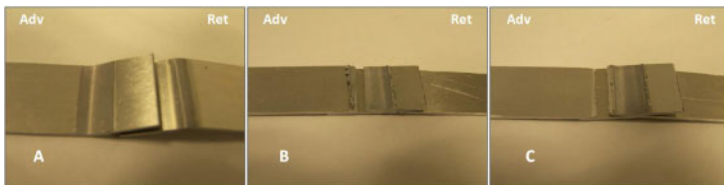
Fracture types in tensile shear strength specimens. (A) Type 1, shear fracture through the interface. (B) Type 2, tensile fracture through the hook feature. (C) Type 3, tensile fracture through HAZ.
